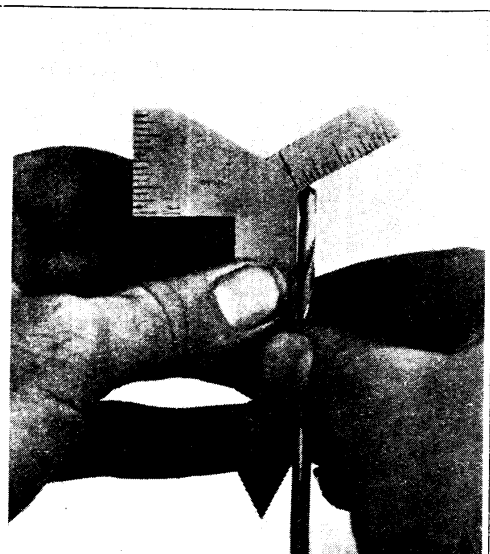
Special gauges for the cutting angle of the drills are employed. The stem of the drill is laid along the upright portion of the gauge, and the drill edge should fit the angle piece accurately
